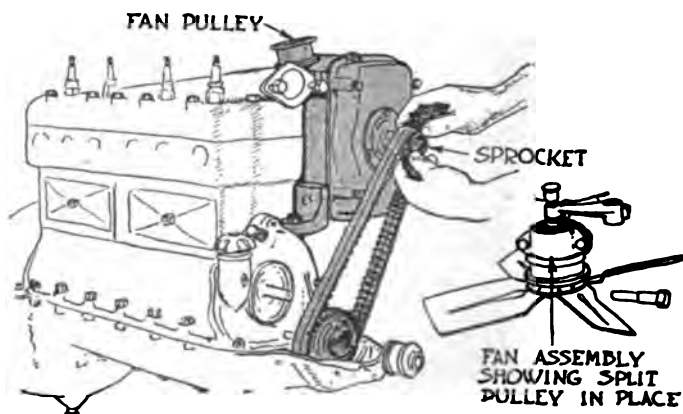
Placing the sprocket on the electrical unit with the chain in place on both the sprockets, and fan assembly
